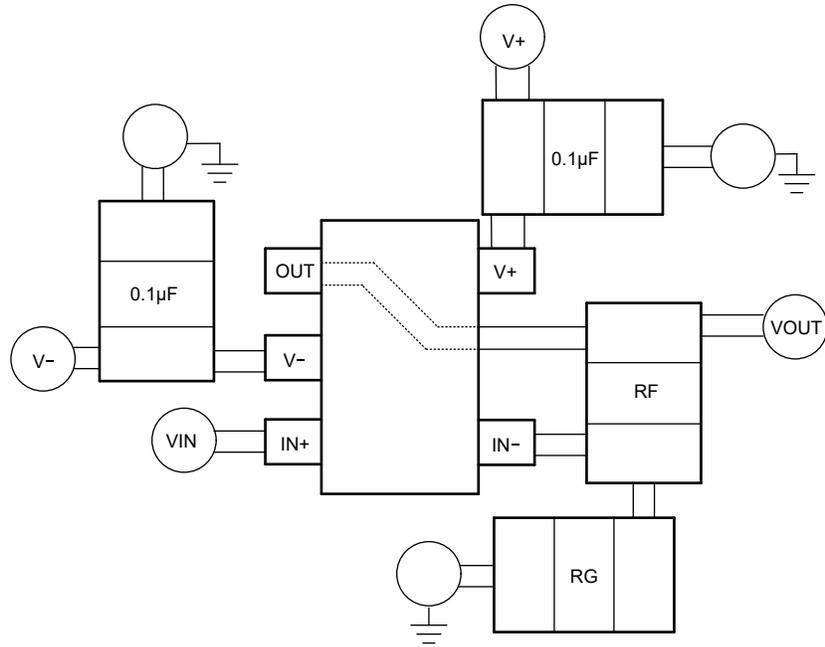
Board Layout for Noninverting Configuration of the SOT23-5 Package
